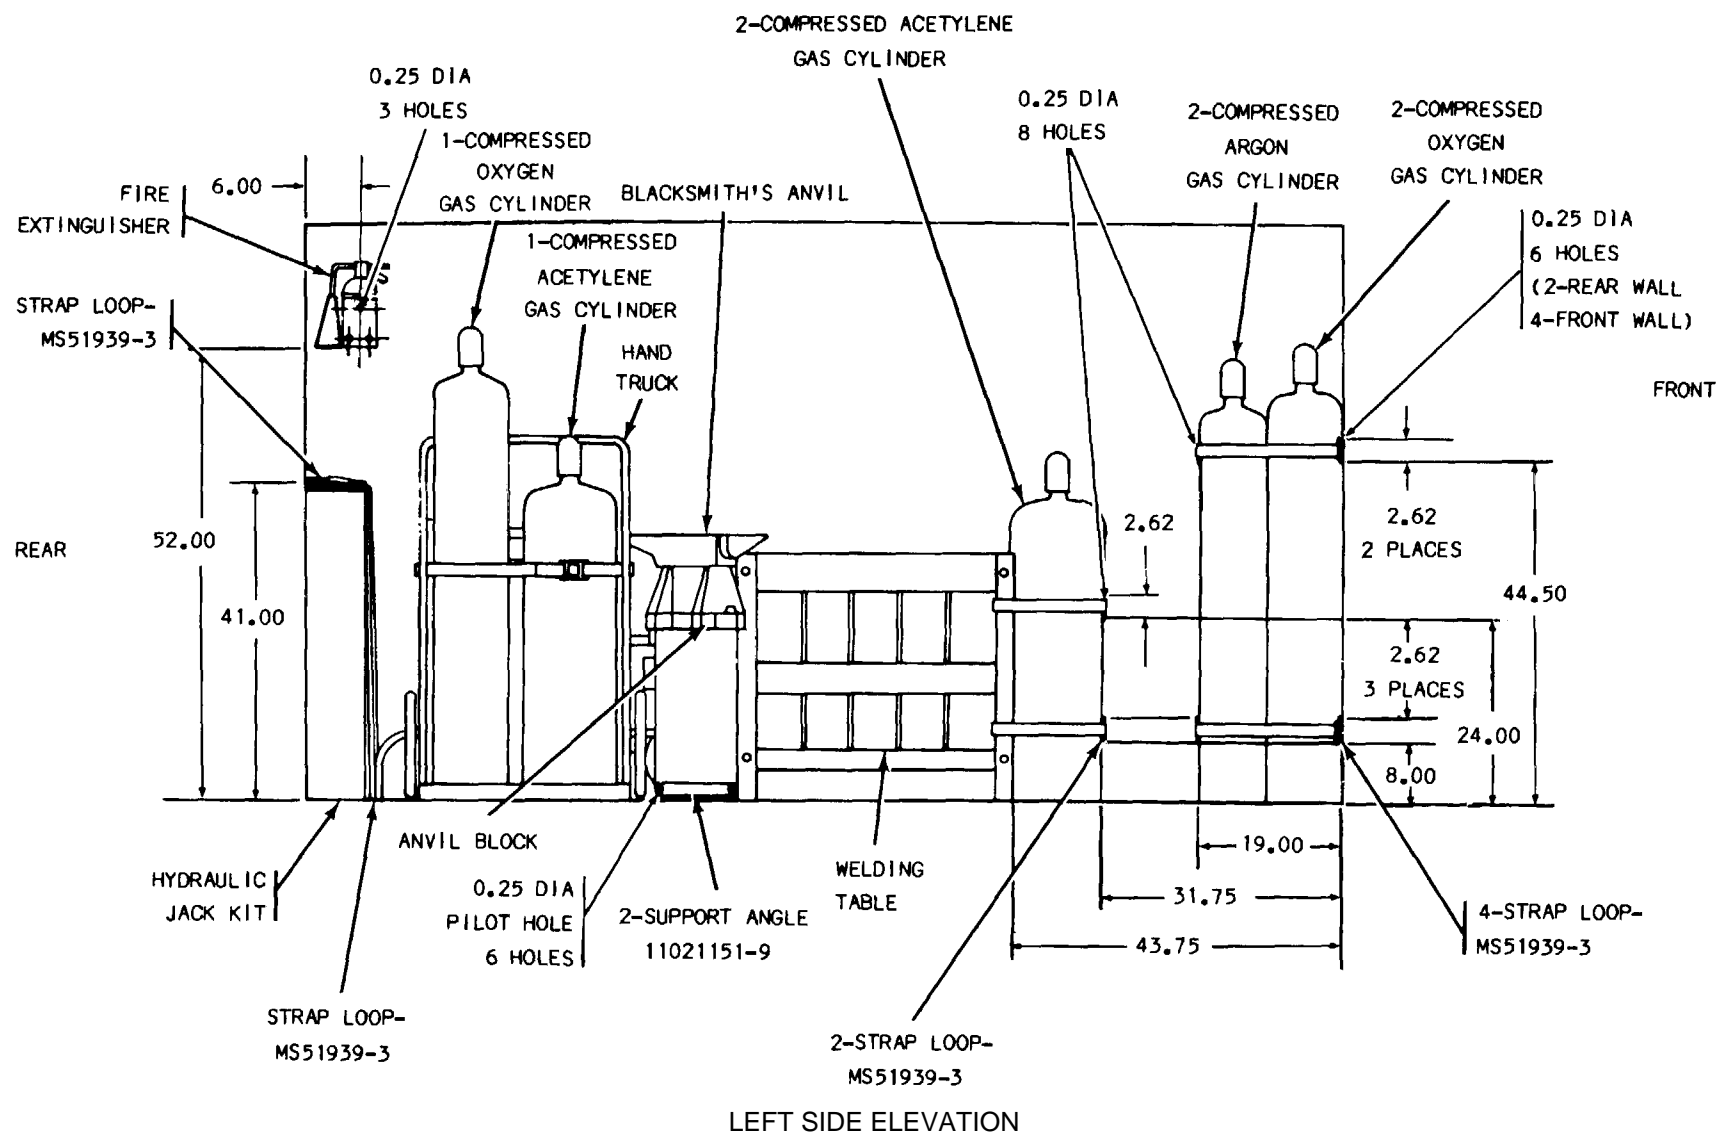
Components to be mounted, left side elevation, unit 1, 280.
